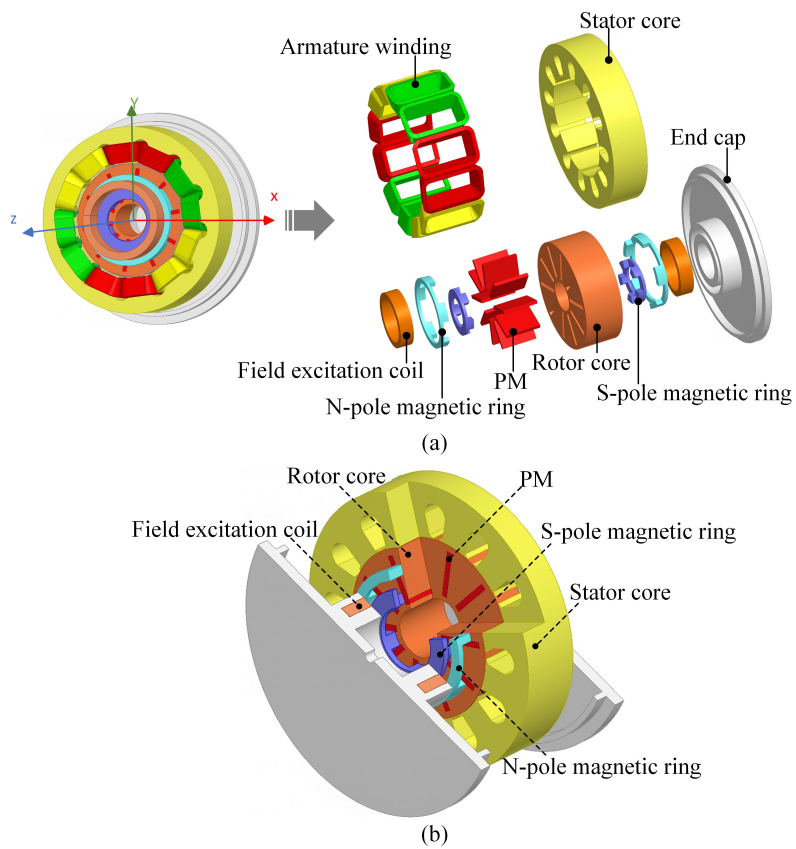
Machine topology: (a) assembly drawing; (b) 3-D cut drawing
